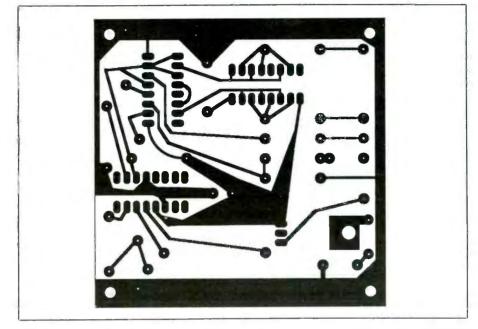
Actual-size etching-and-drilling guide for project's printed-circuit board.
